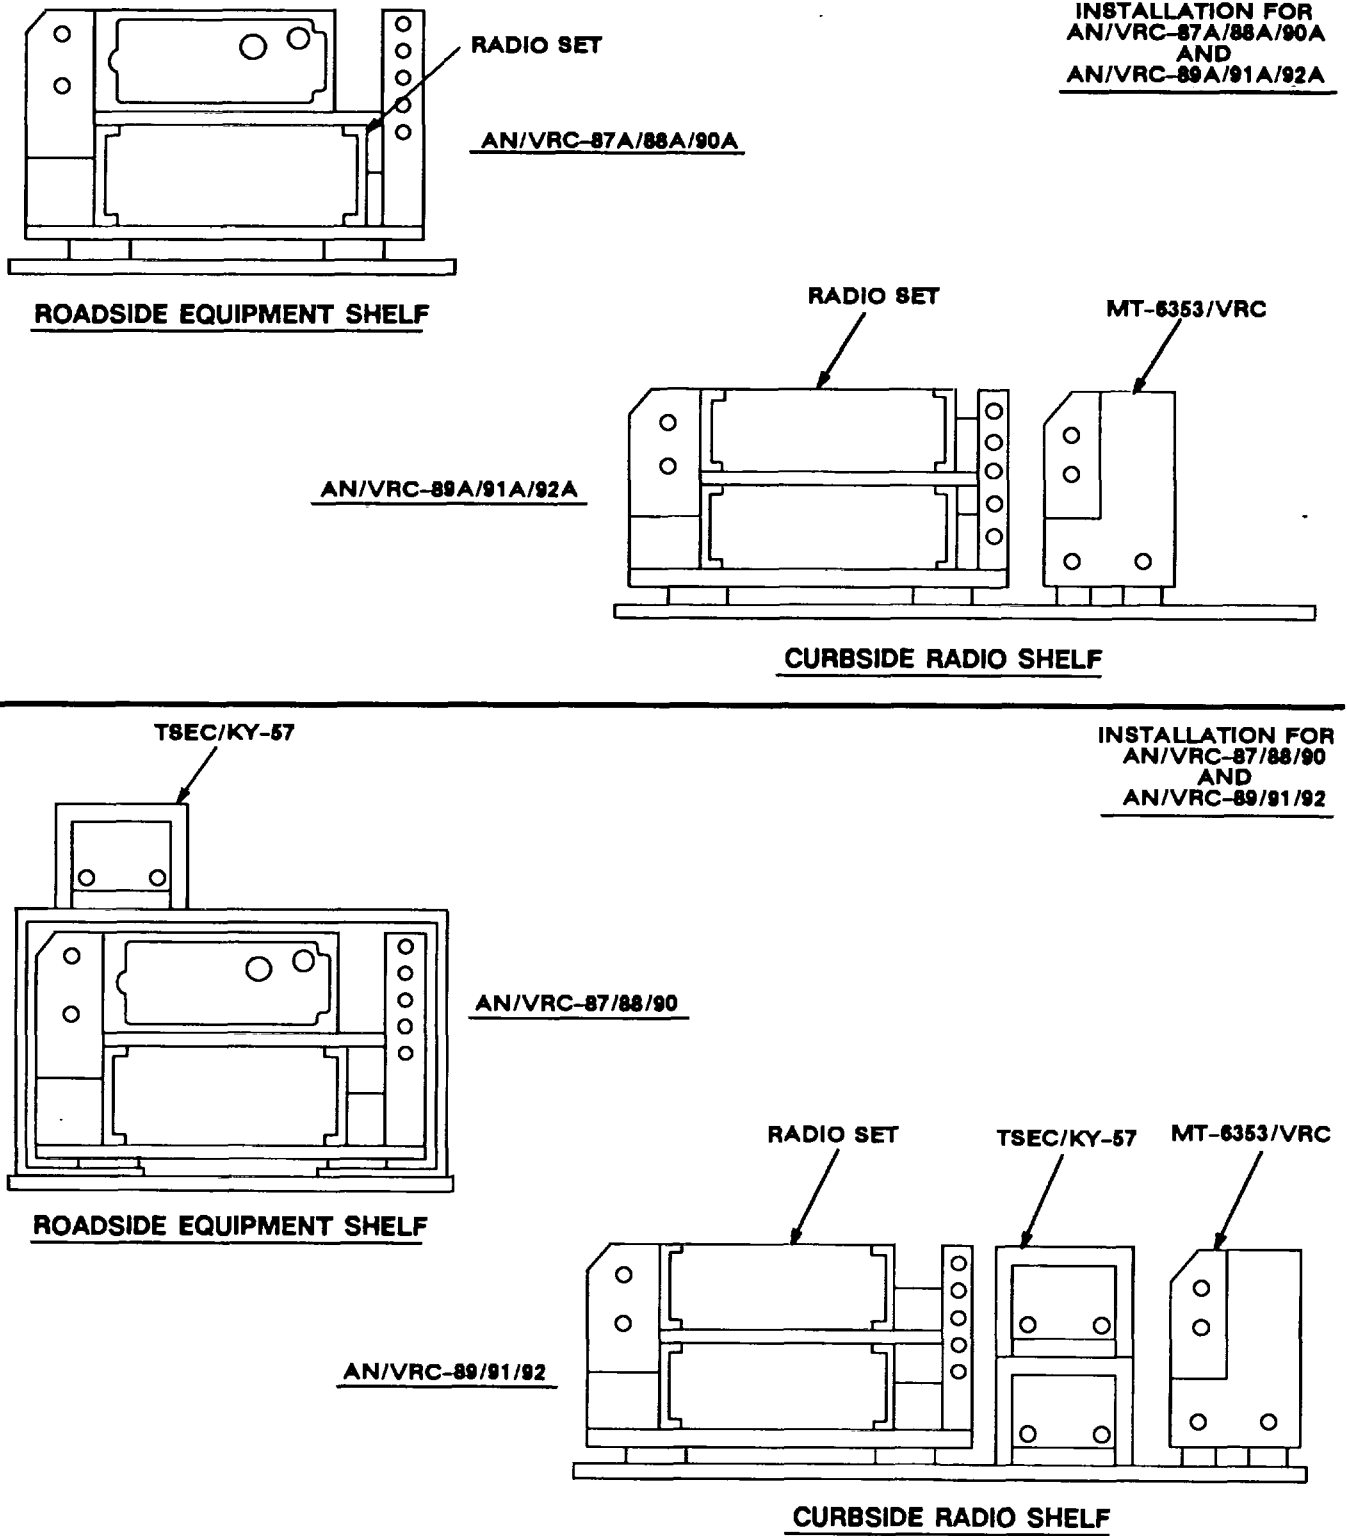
(2). MK and Radio Installation: Radio Equipment Locations
